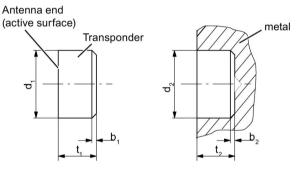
Flush-mounting of MDS D421/D521/E623 in metal with tools
